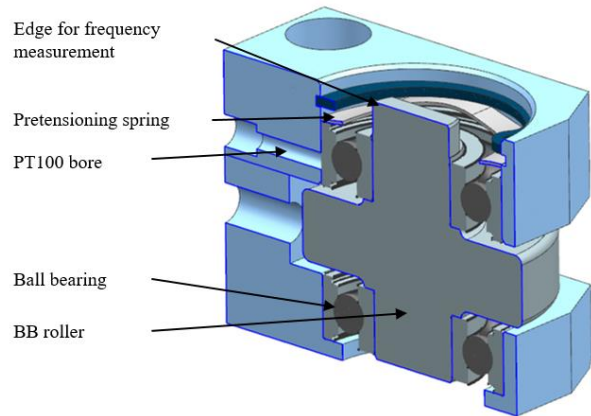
The backup bearing unit (BBU) consisting of two ball bearings sustaining a roller, which limits the rotor movement.
